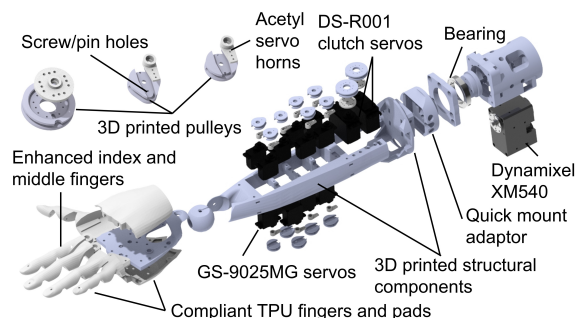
Exploded view of the ASL forearm and hand module. The quick slot adaptor and actuator module are shown on the right, and the pulley designs are shown on the top left. The compliant index and middle fingers were modified to fit an adjustable elastic return system for finger abduction.
